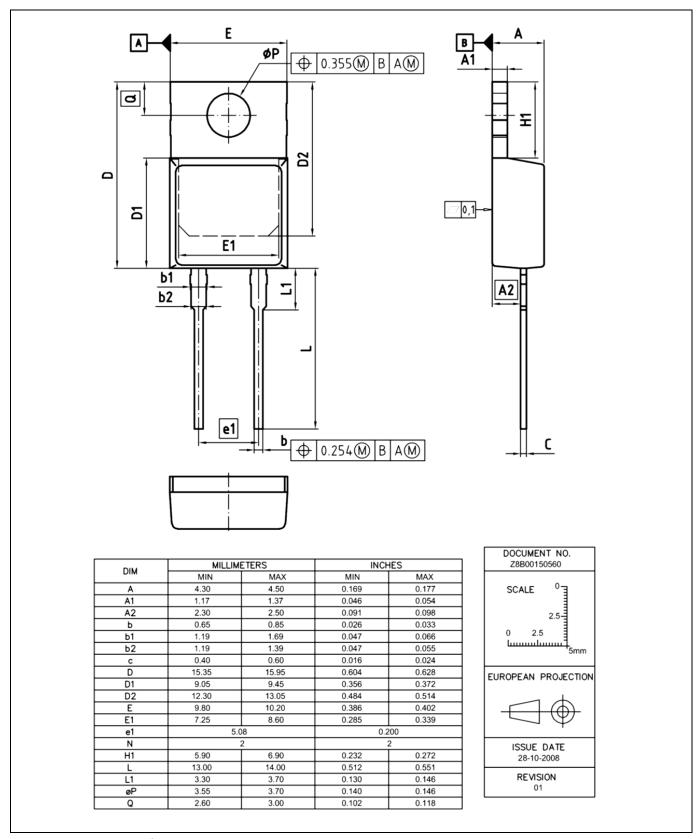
Outlines of the package PG-TO220-2, dimensions in mm/inches
